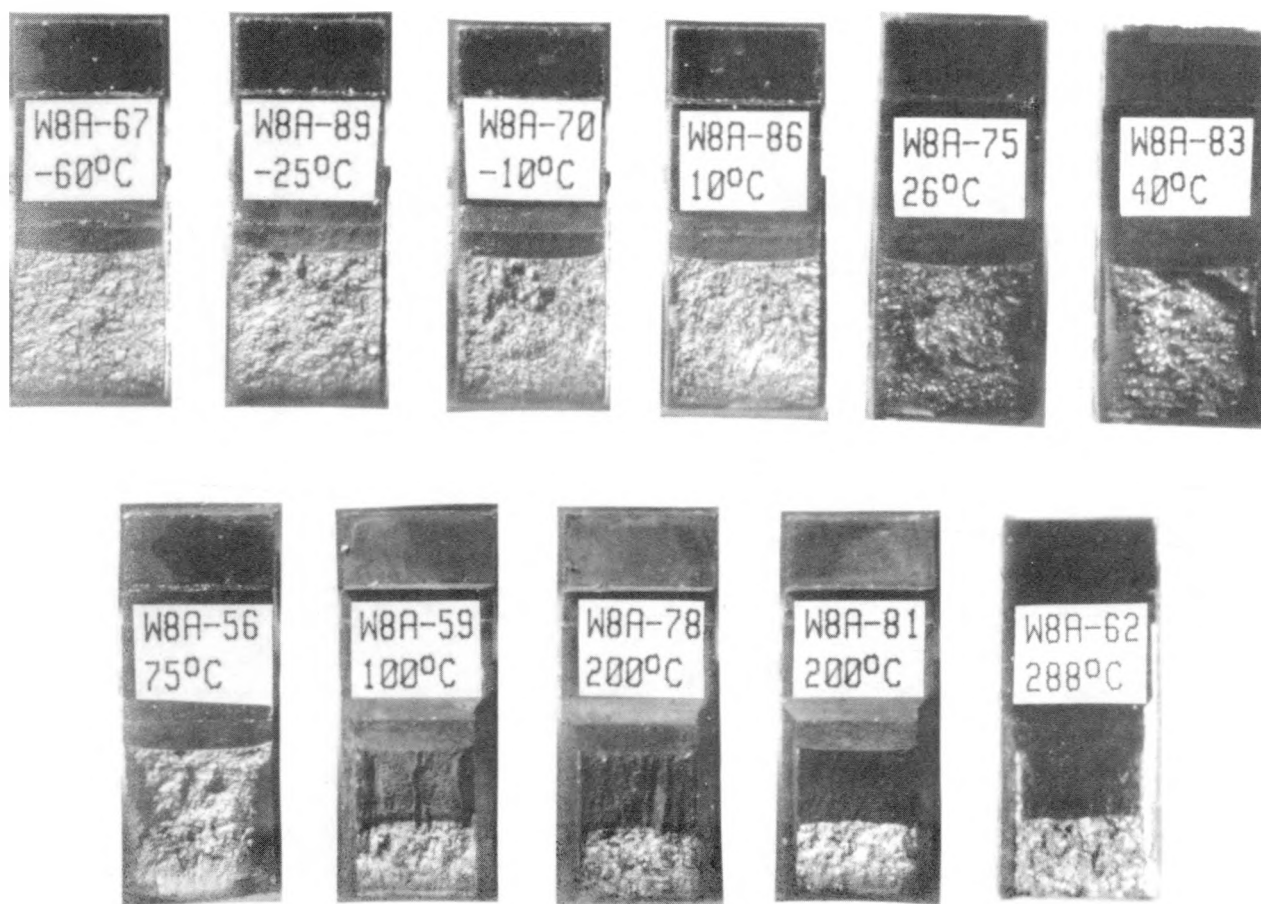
Fracture surfaces for the Linde 80 weld (W8A), in the IAR condition to a total fluence of 2.2×10^{19} n/cm².
